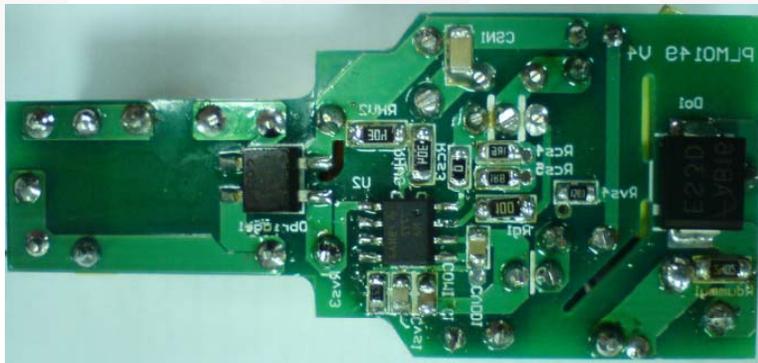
Bottom View (Dimensions: 58.0 mm (L) x 26.5 mm (W) x 18.0 mm (H))
